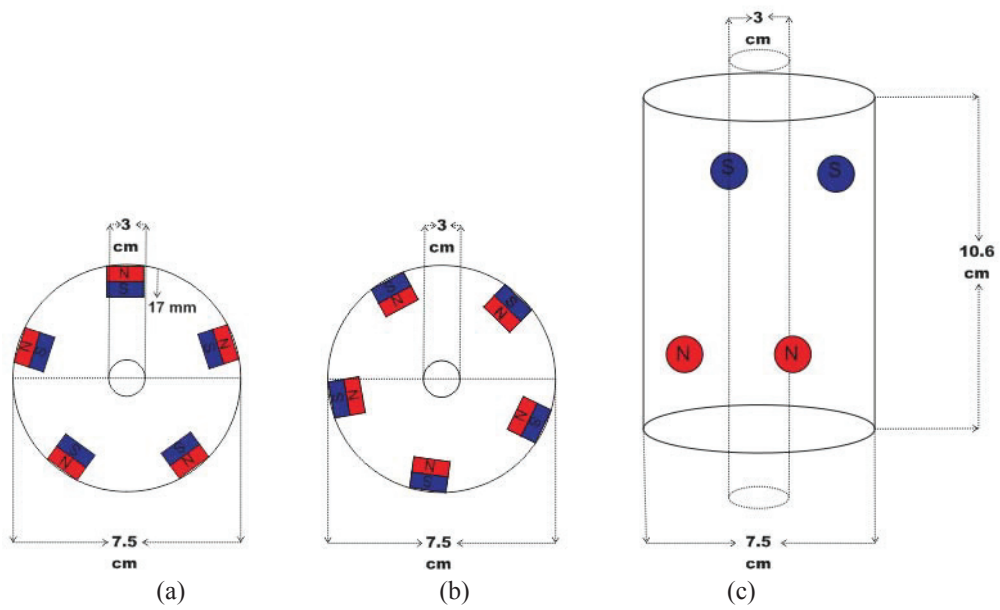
The shape and method of fitting the magnet into the rotor: (a) Front view, (b) Rear view, (c) Side view.
